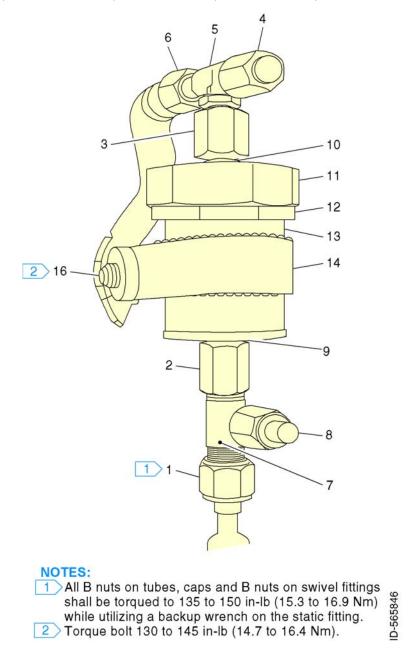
(Sheet 1 of 1) PC Filter Assembly (LTS101-650B-1, LTS101-750B-1, LTS101-850B-2)
